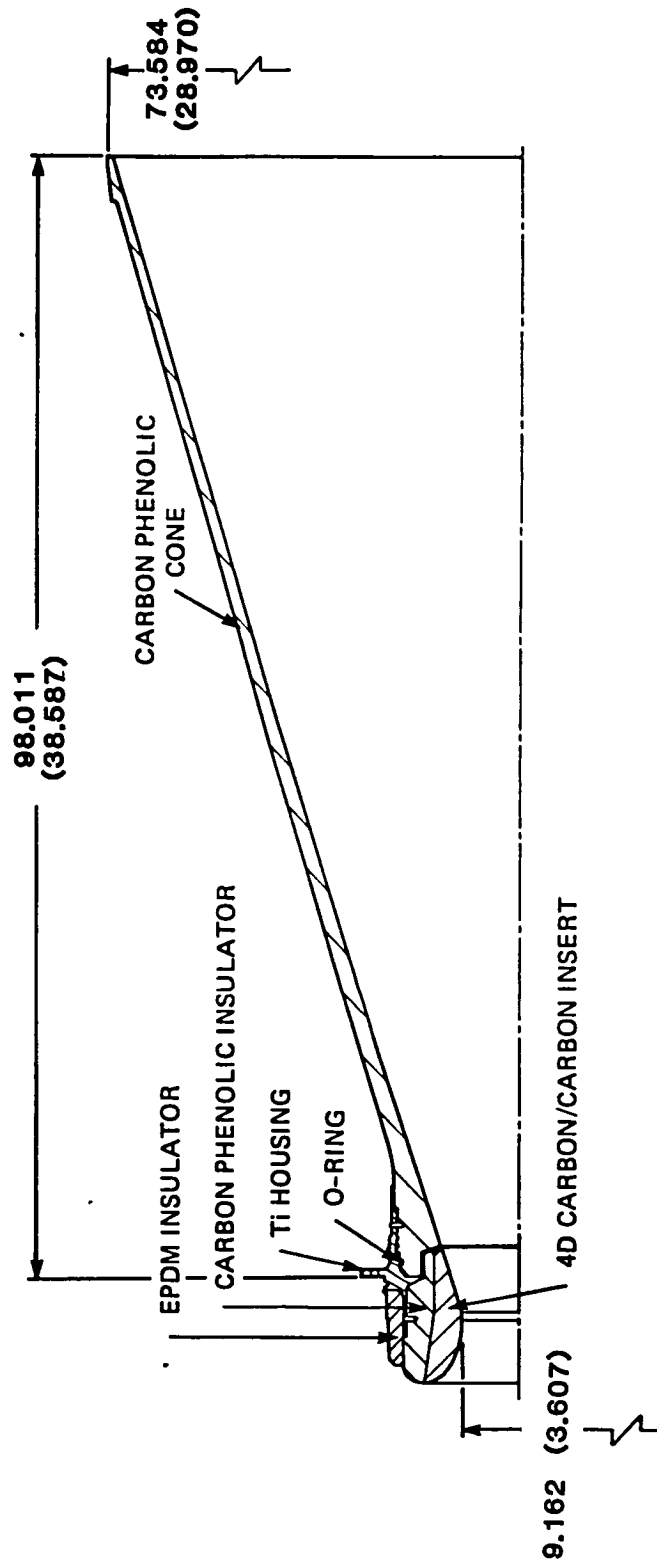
Nozzle Assembly, Motors D-2 and D-3
